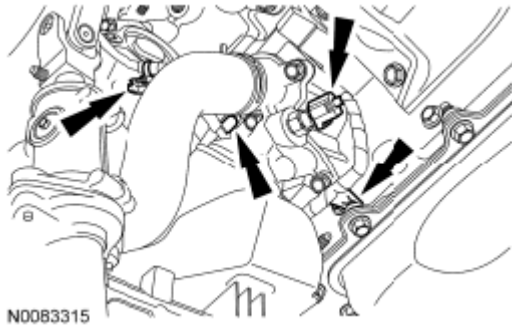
Locating Engine Oil Pressure (EOP) Switch Electrical Connector
